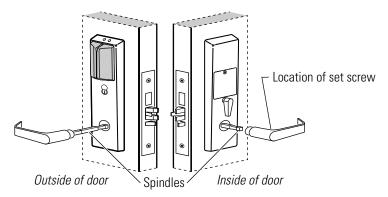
Removing and reinstalling the levers (B.A.S.I.S. Lock shown)
